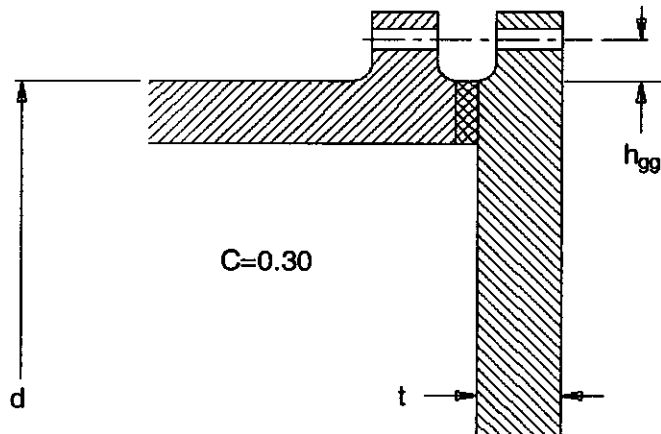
Dimensions of ASME VIII UG-34 unstayed flat head
